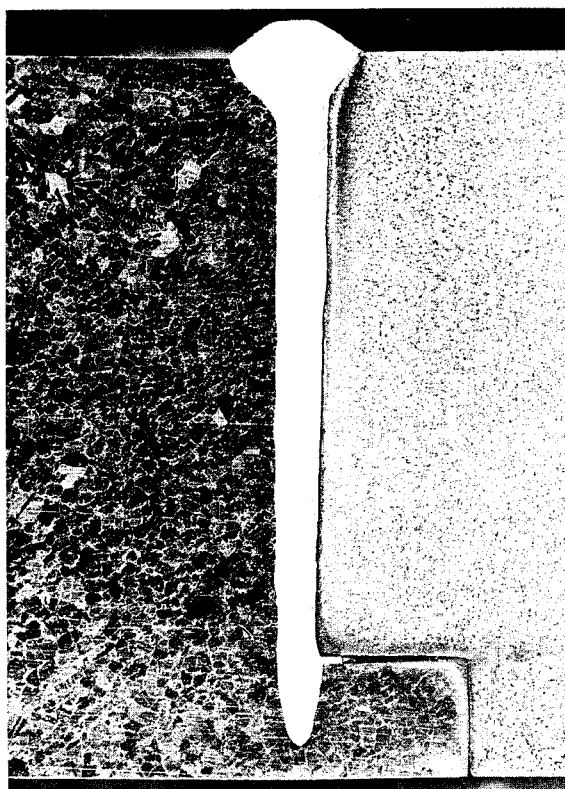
Electron-beam butt weld of udimet 500 to 4340 steel .675-inch thick.
